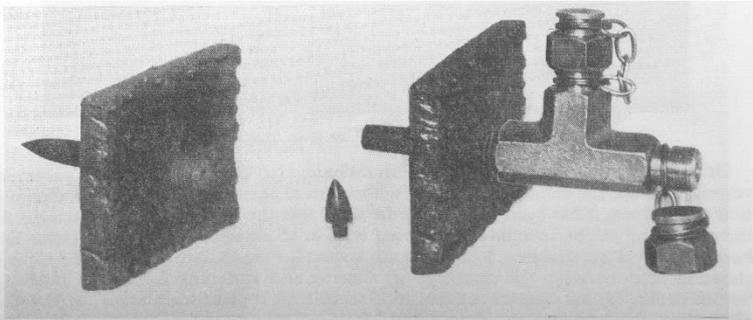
Hollow bolt fired through  $\frac{3}{8}$  inch steel plate. (Left) Before removal of solid nose. (Right) After solid nose is unscrewed and with adaptor for compressed air supply attached
